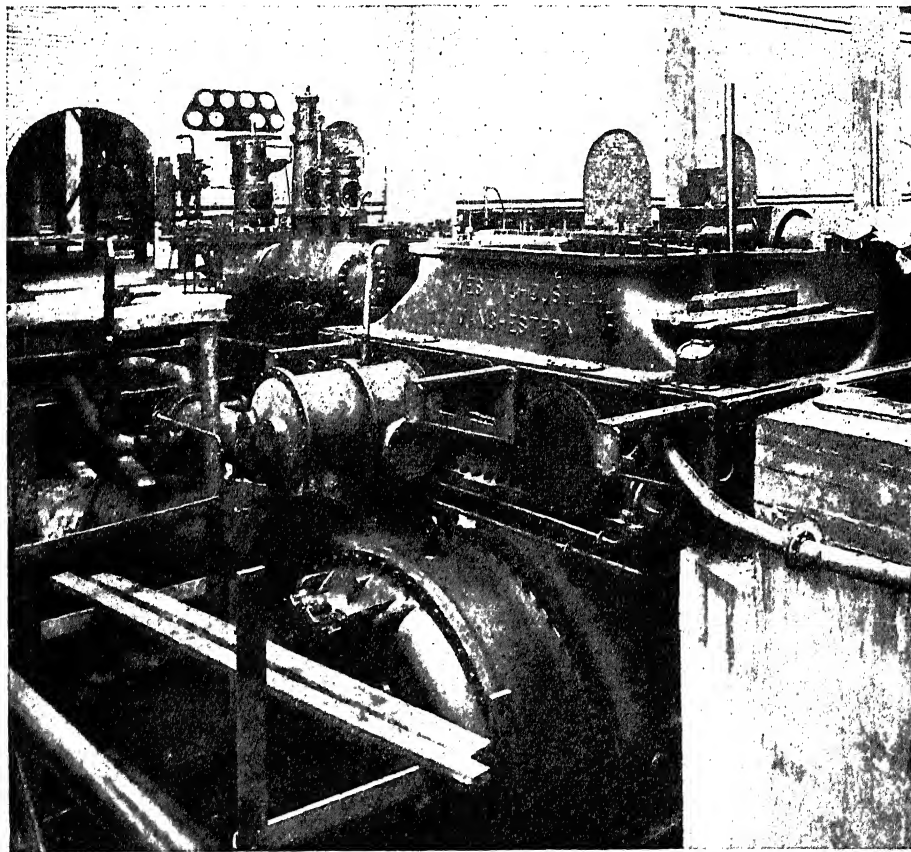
20,000-kw. Turbo-alternator in Course of Erection, showing bottom half of Turbine Cylinder in position, with Condenser and Valve Chest coupled up
